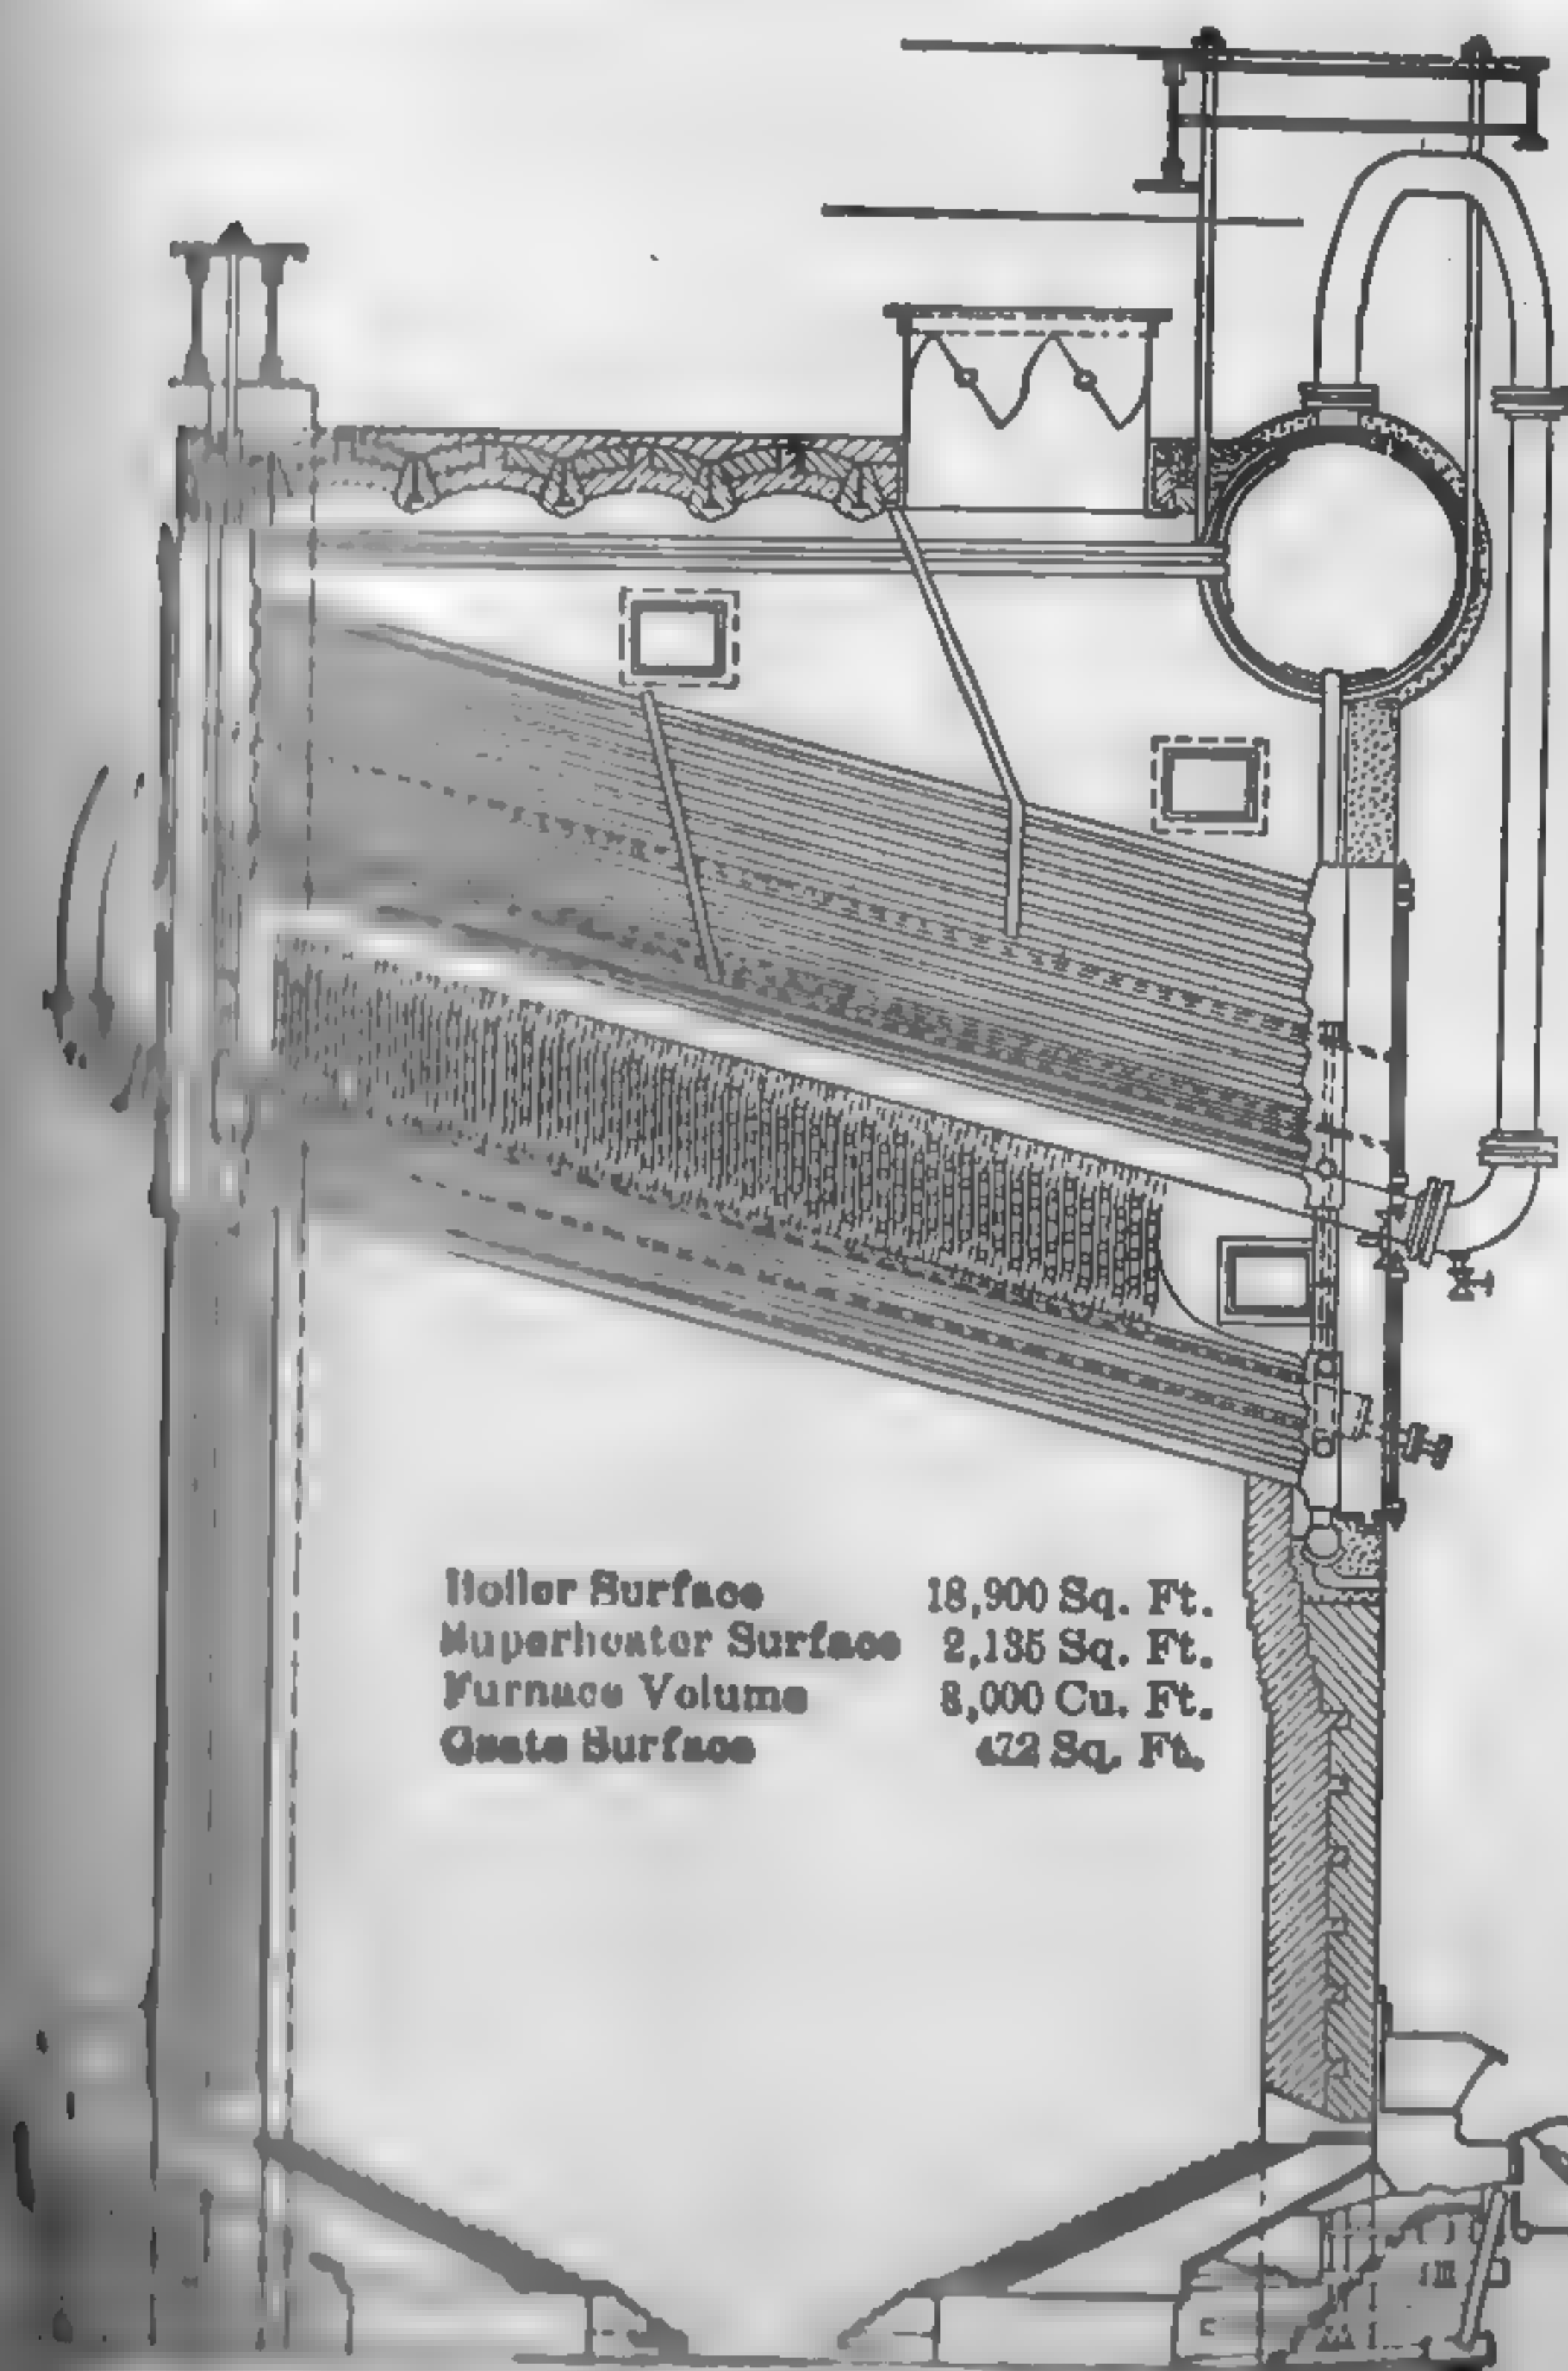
Elesco Superheater Installation — Hell Gate Station.
